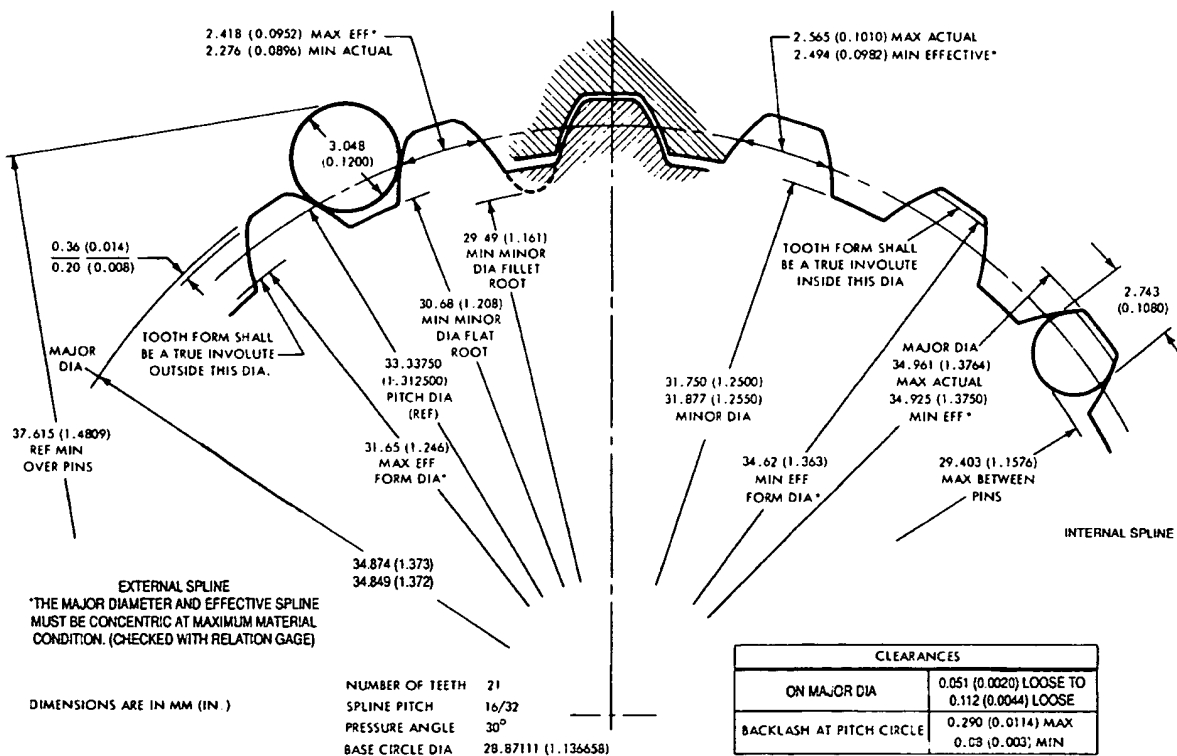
Type 2 power take-off 1000 r/min—35 mm (1 3/8 in.) diameter—involute spline dimensions
